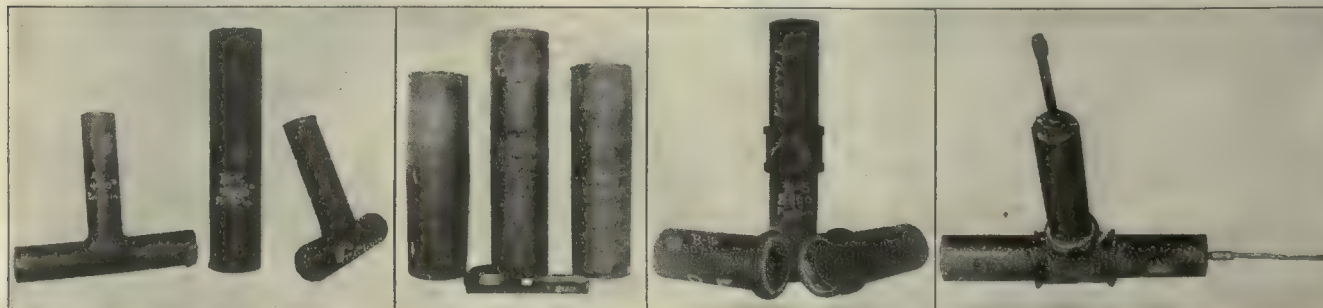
DETAILS OF THE HYDRAULIC PUMP USED
